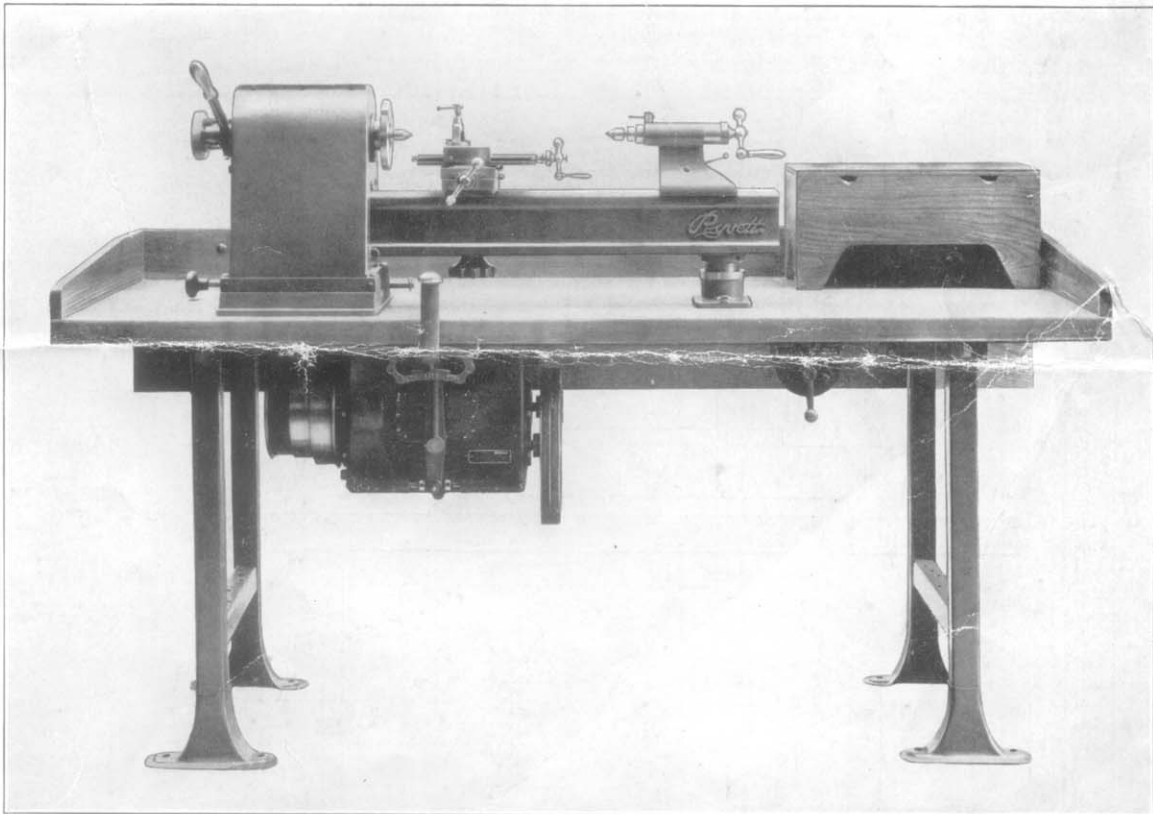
Rivett Series 505 lathe, enclosed head type, with Jack Pedestals on unit bench with Speed Box Motor Drive, hand lever control
